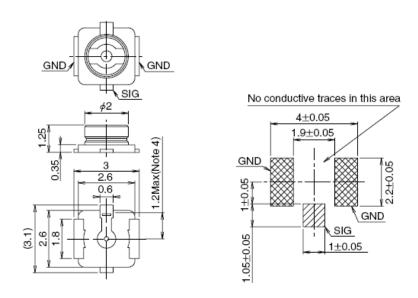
Dimensions of U.FL-R-SMT Connector (Unit: mm)
